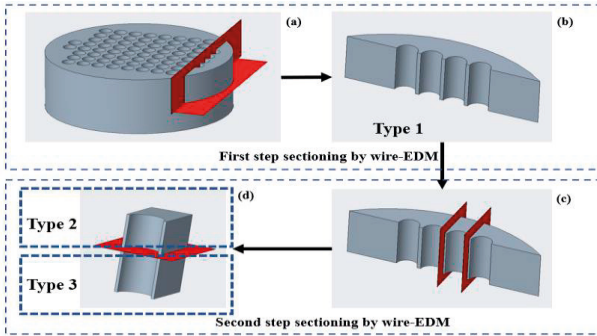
Schematic drawing of the workpieces sectioning by Wire-EDM. Step 1: (a) The workpiece was cut to (b) get the strip with cross-sectional holes; Step 2: (c) The specific hole was cut again (d) to be in two parts.
